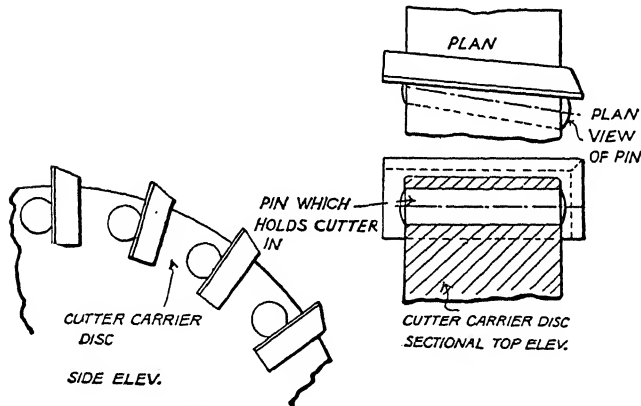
Inserted Cutters, set spirally, held with Pins flattened to bear against Cutters
